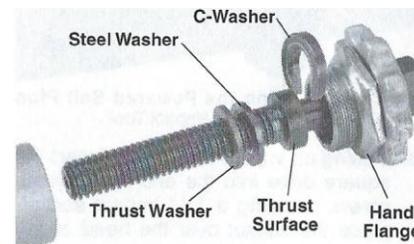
Unit Assembly: Orient C-Washer and Steel Washer With Chamfer Towards Thrust Surface
